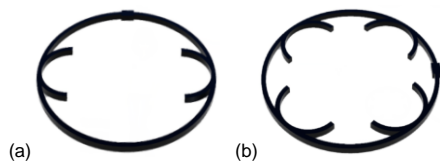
Single U-tube pipe spacer ring (a) and double U-tube pipe spacer ring (b)
